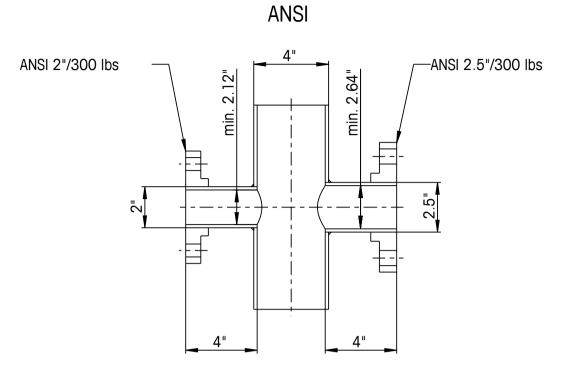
Recommended welded flange dimensions (for standard (SP) and non-purged (NP) and blowback (B) probe installations)
